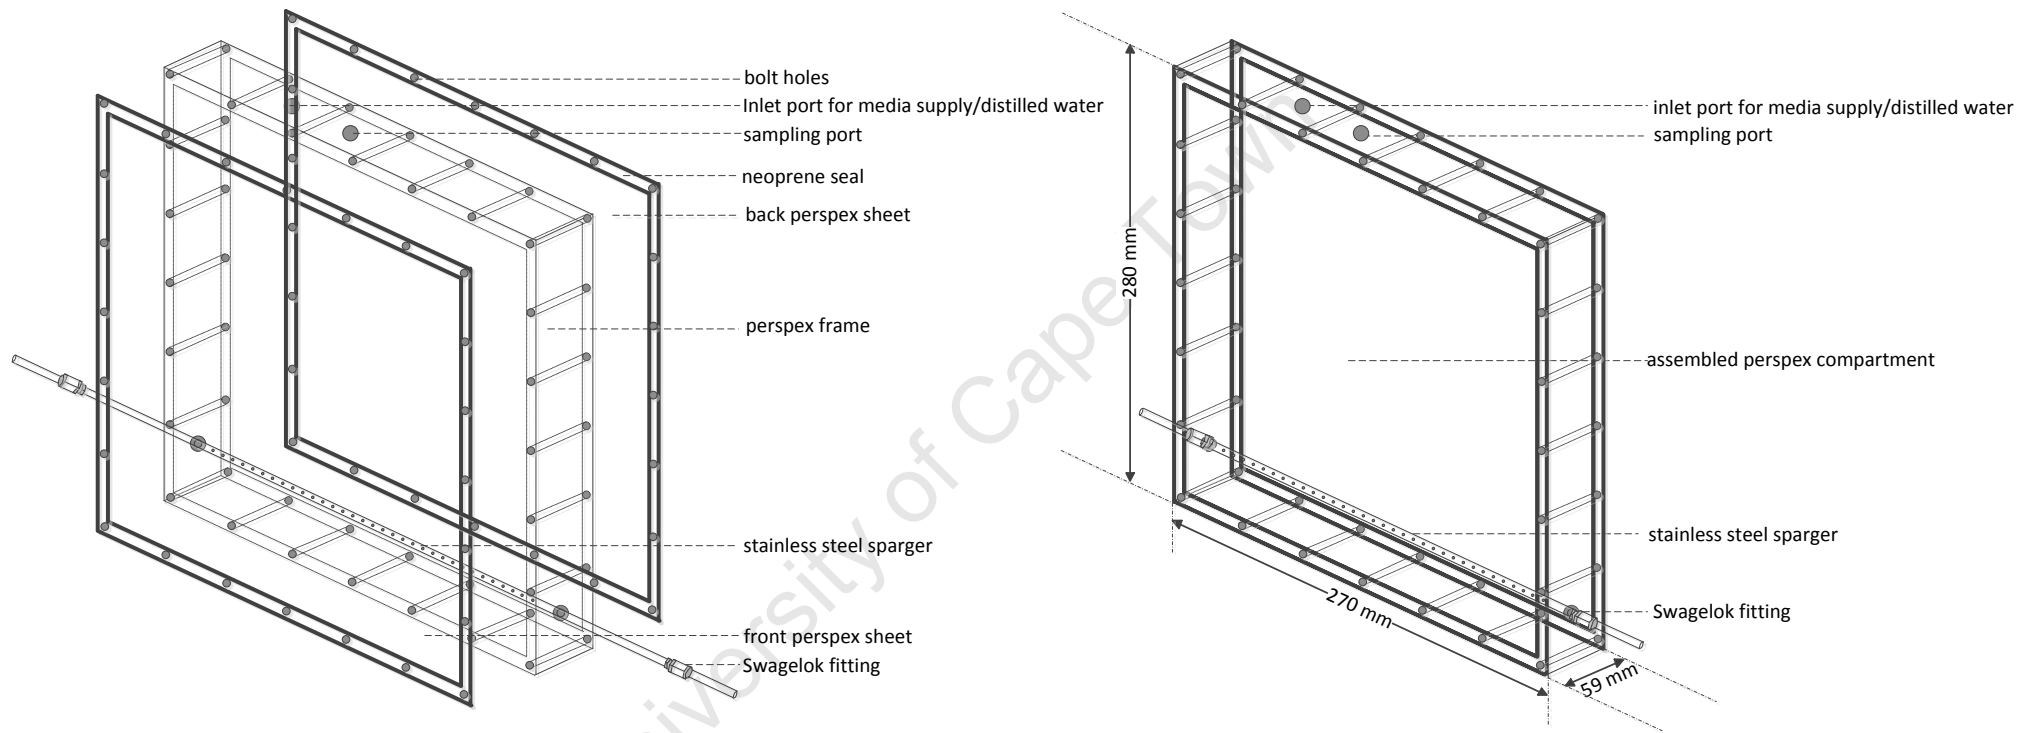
4: Schematic of vertical flat plate photobioreactor (left: exploded view; right: assembled view)
